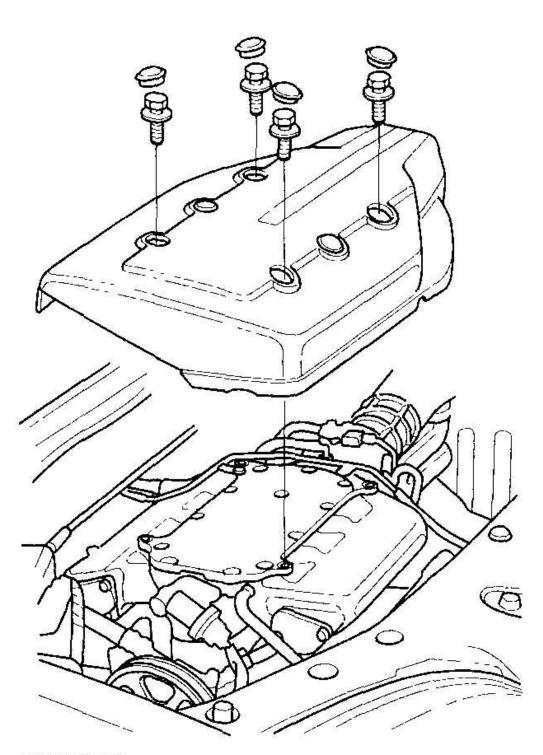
Exploded View Of Intake Manifold Courtesy of AMERICAN HONDA MOTOR CO., INC.
